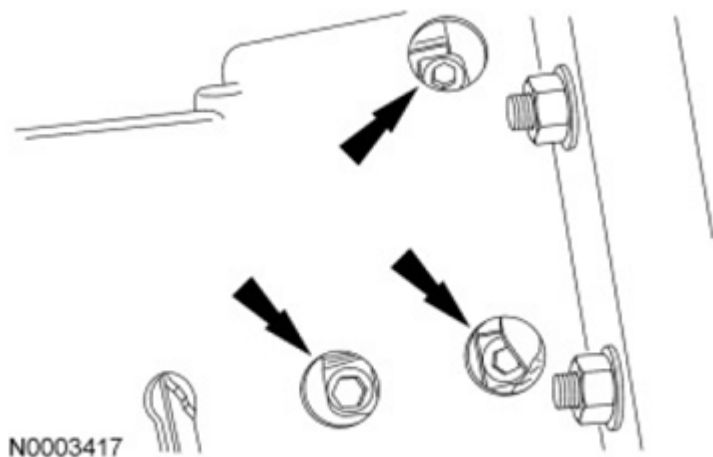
Removing Bolt Access Holes For A/C Compressor
